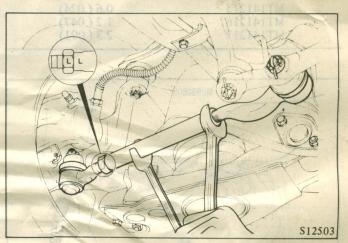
Adjusting Toe-in Camber (Figs. 4 and 5)
